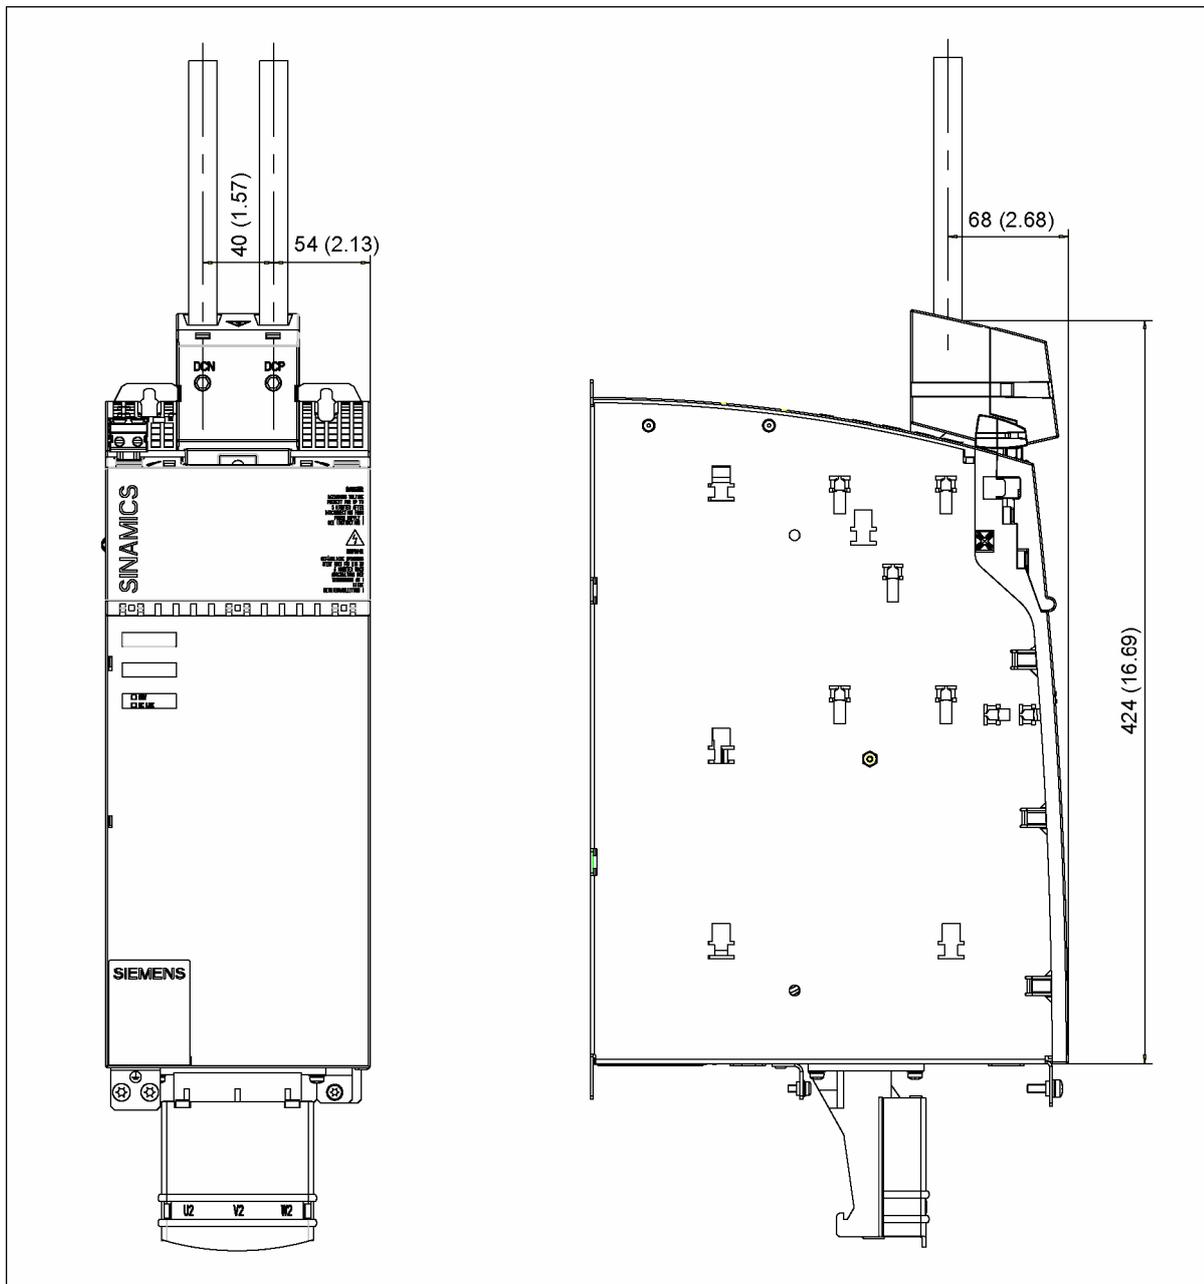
Dimension drawing, 150 mm components with DC link rectifier adapter for 35 mm² to 95 mm²
